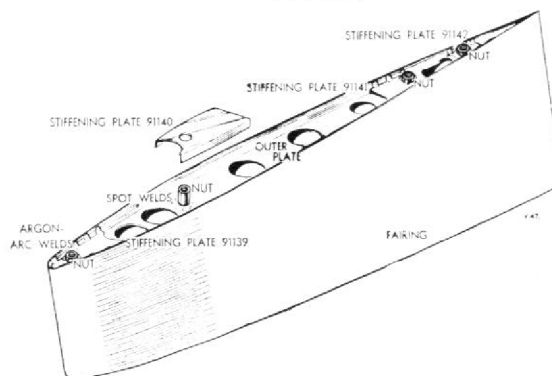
Fairing with one of the stiffening plates removed to show the spot welds which secure the nut to the outer plate.
